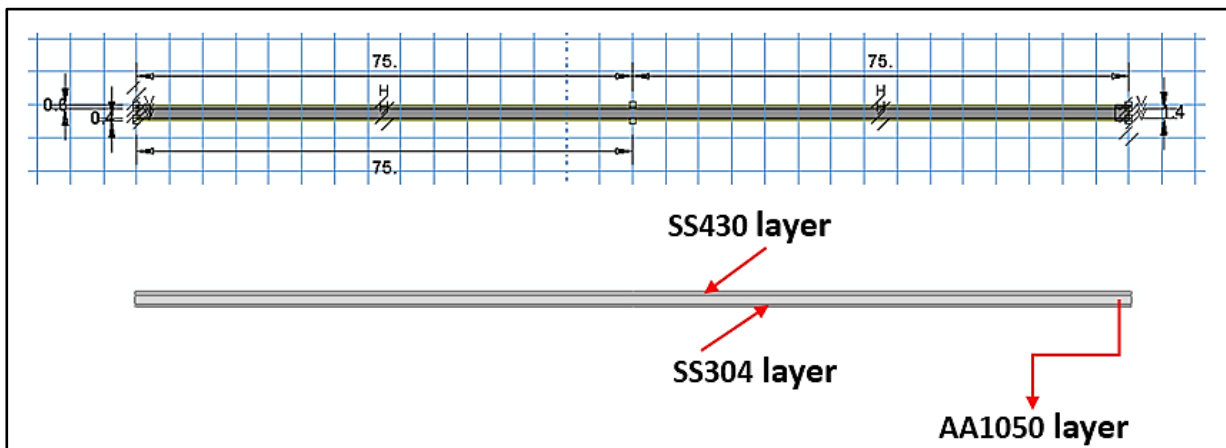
CAD model of blank of 3-ply clad sheet
